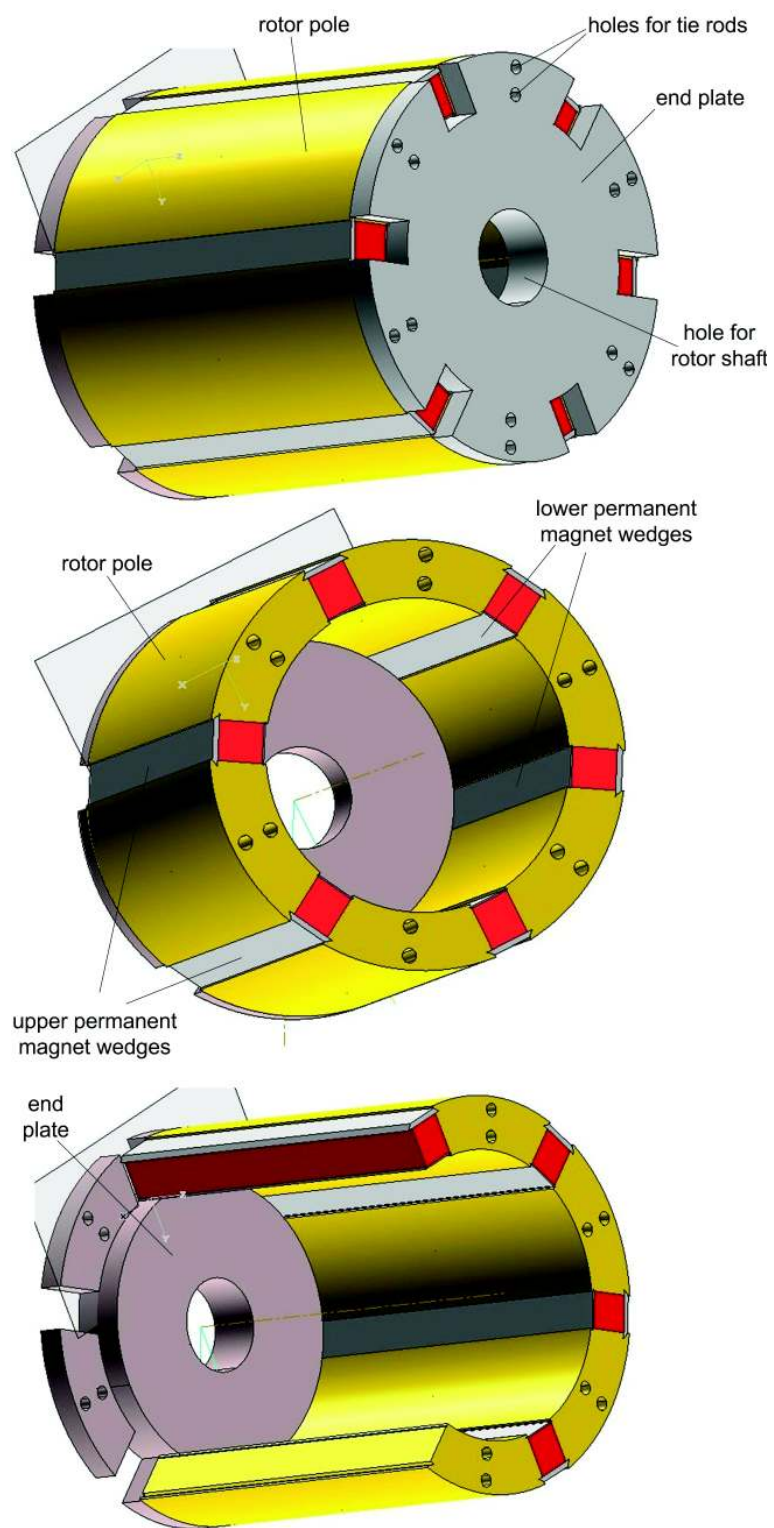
Illustrative views and cross sections of the prototype rotor.
